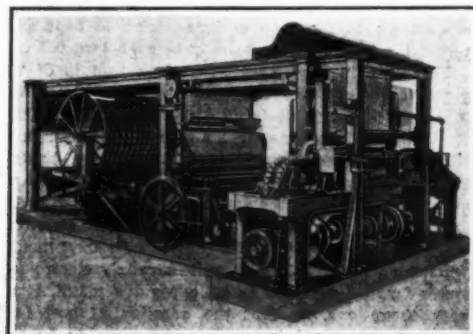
"AUTOMATON" MATCH MACHINE.
